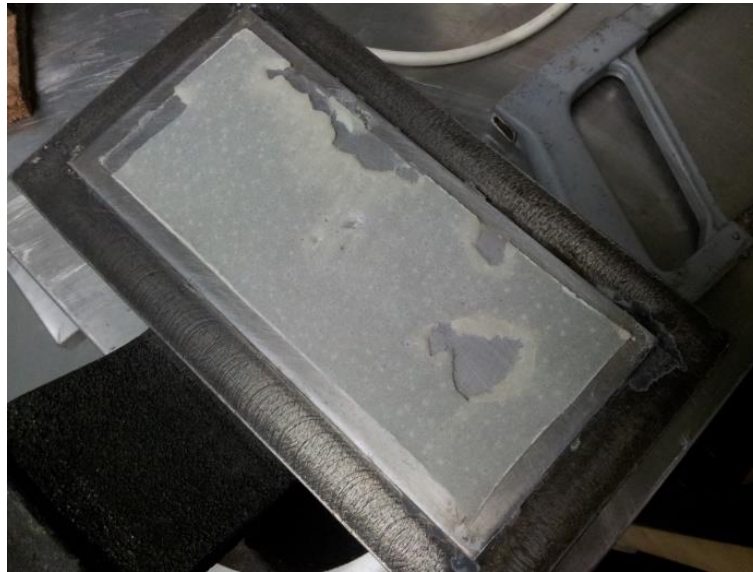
Final result of bulk sheet plates of adhesive AV138
